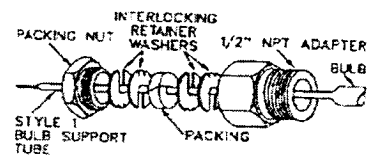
Part No. FTG13A-600R packing nut assembly.
